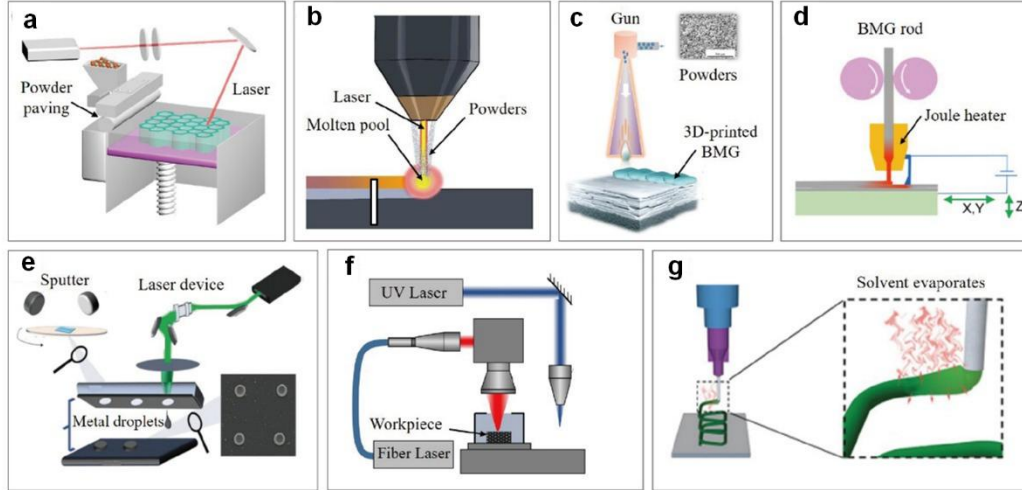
2 3D printing techniques for BMGs. (a) Laser powder bed fusion [53]; (b) directed energy deposition[54]; (c) thermal spray 3D printing [48]; (d) fused filament fabrication [49]; (e) laser induced forward transfer [50]; (f) laser foil printing [55]; (g) direct ink [52].
